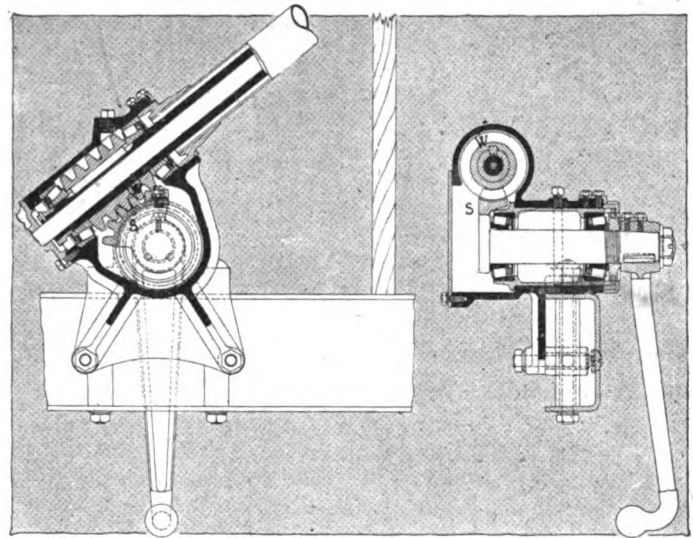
Transverse and longitudinal sections through Stoddard steering gear
